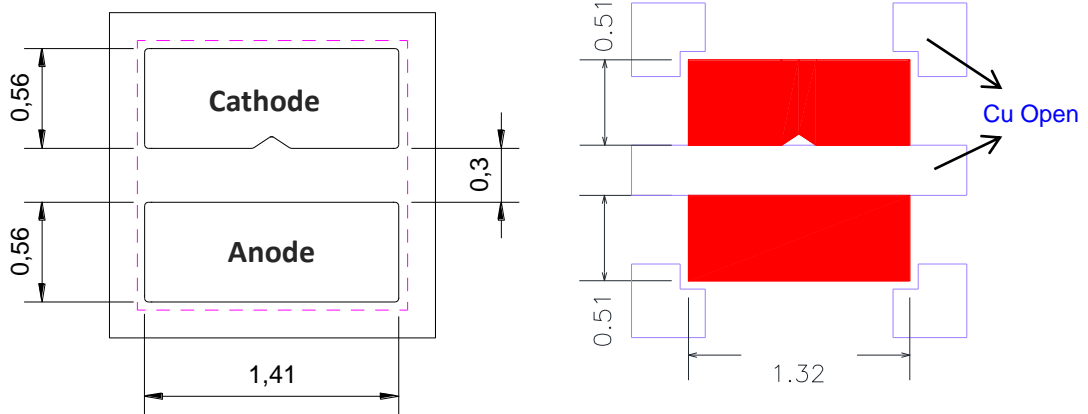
(c). Referenced PCB Footprint for. Y19 All dimensions in mm.
